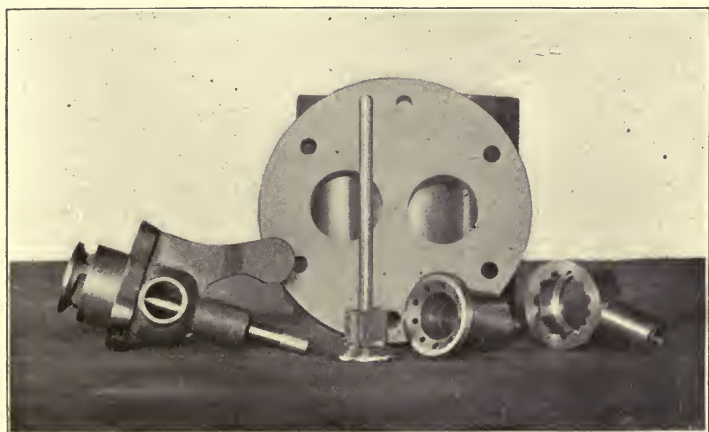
CYLINDER HEAD, INLET AND EXHAUST VALVE PARTS.
